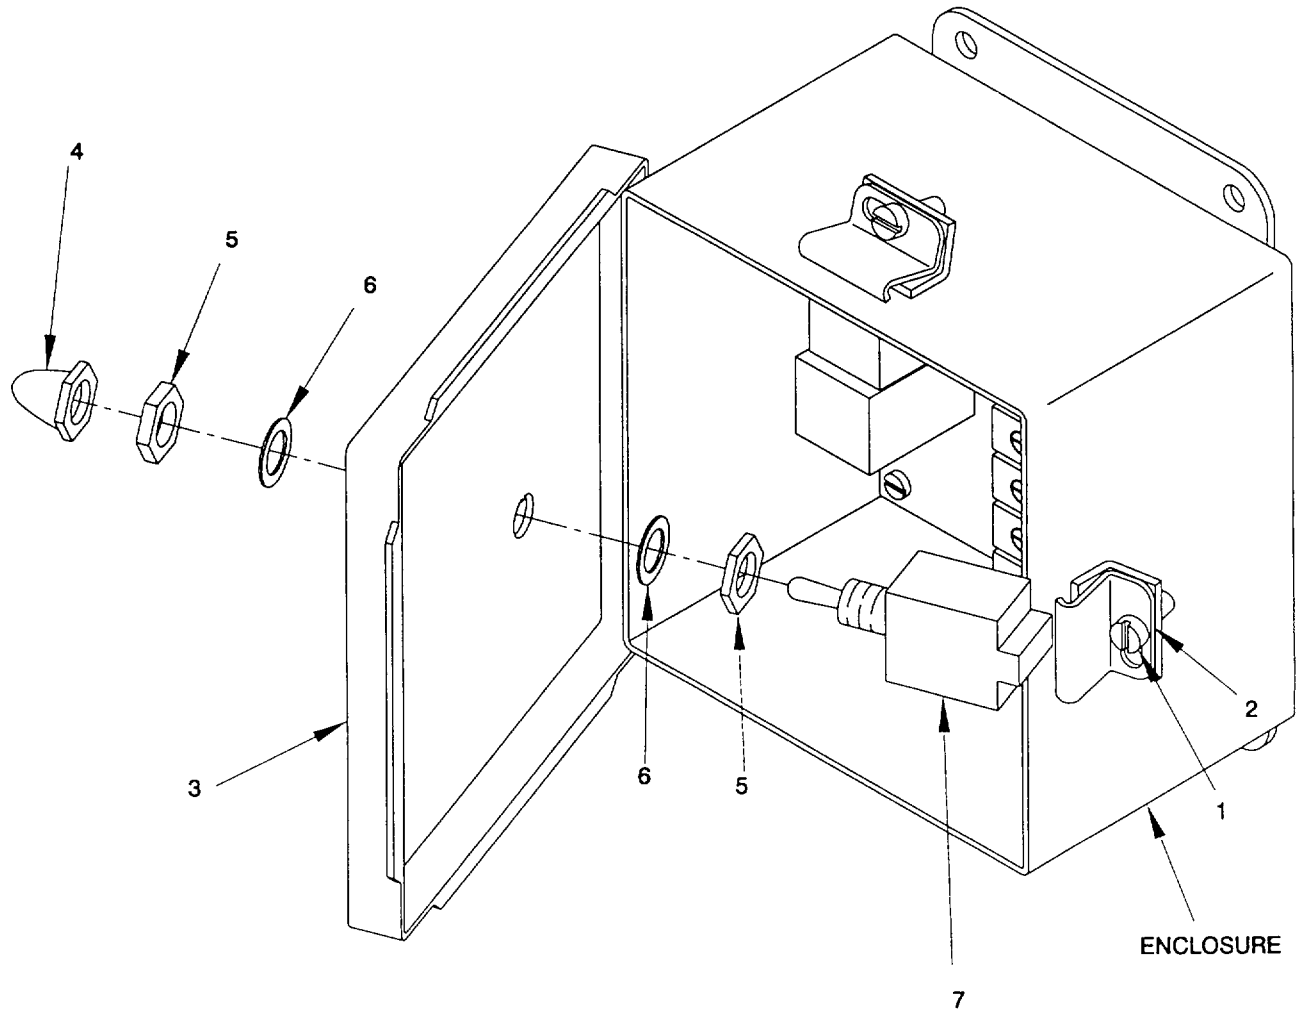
Toggle Switch, Single Bilge Pump Control Assembly "A7", Remove/Install
